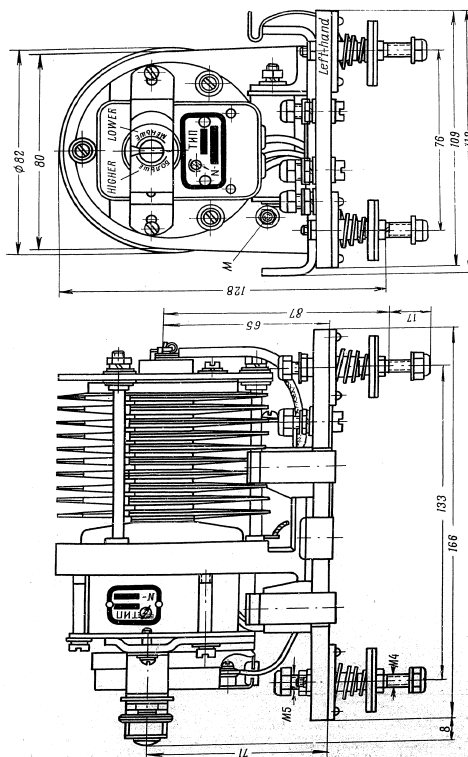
Overall Dimensions of p-27 Regulator with Shock Absorbing Panel (left hand)
